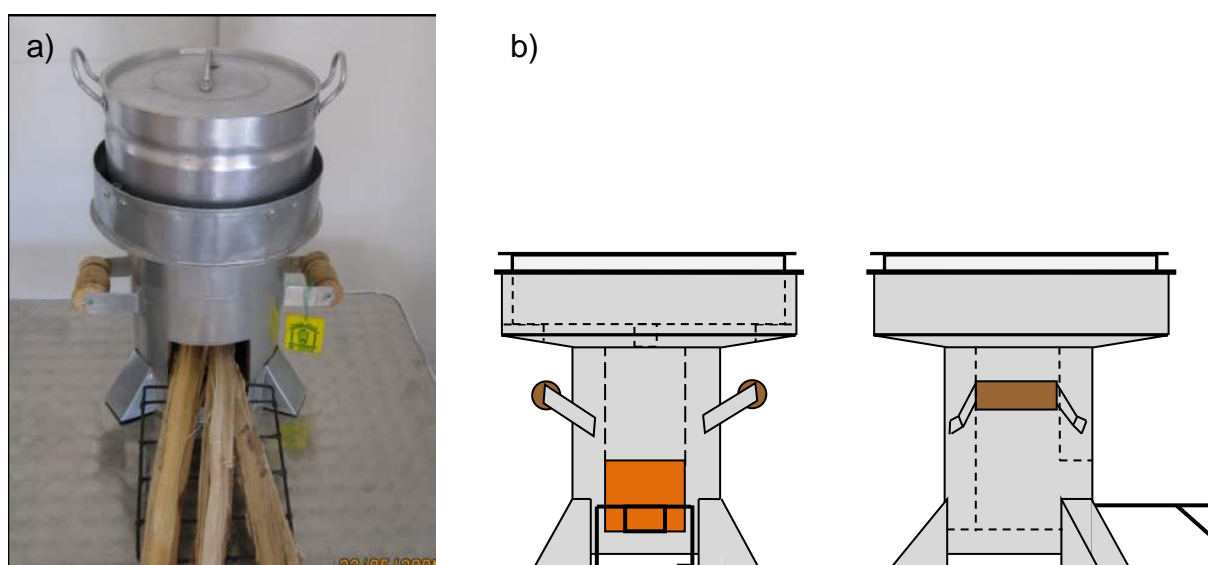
Photograph (a) and technical drawing (b) of Tikikil portable household cook stove.⁷
